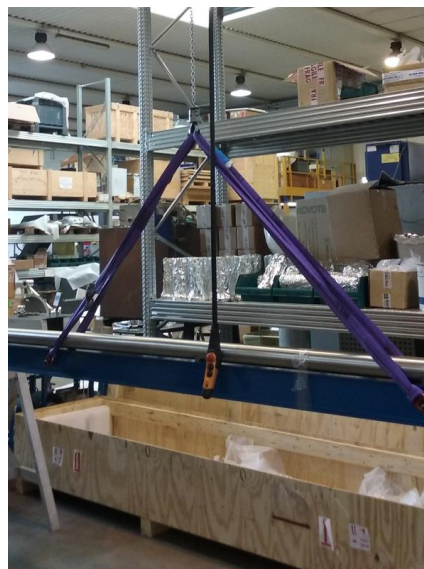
SMI: Cinel completed fabrication of the Removable Shielded Beampipe several months early, enabling shipping and installation together with the optical component portion of this procurement package. This photo shows how the pipe is lifted on its hoist points.
